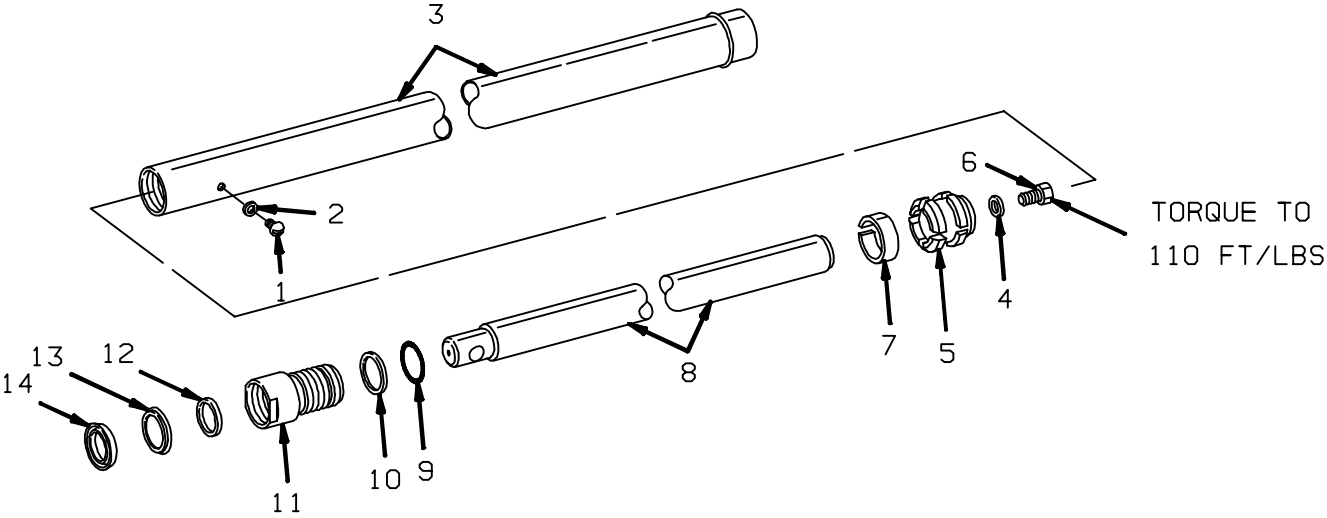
TWO STAGE MAST HYDRAULIC ASSEMBLY
